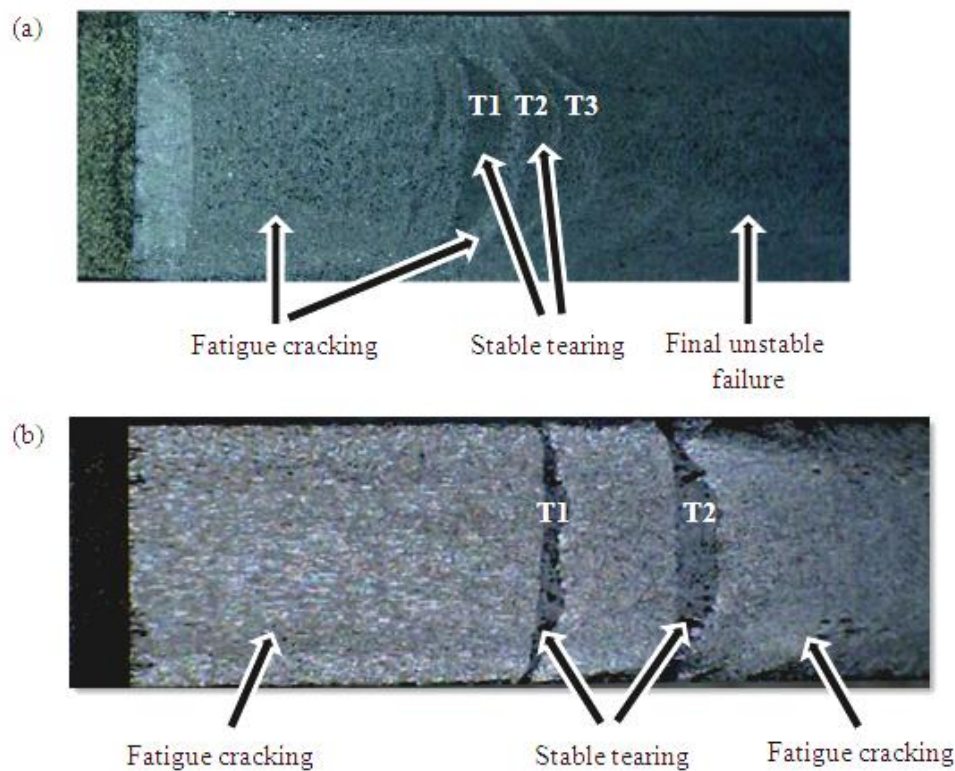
Examples of macrographs of fracture surfaces as captured by a digital microscope for: (a) CA tearing (specimen CA4), and (b) VA tearing (specimen VA20).
